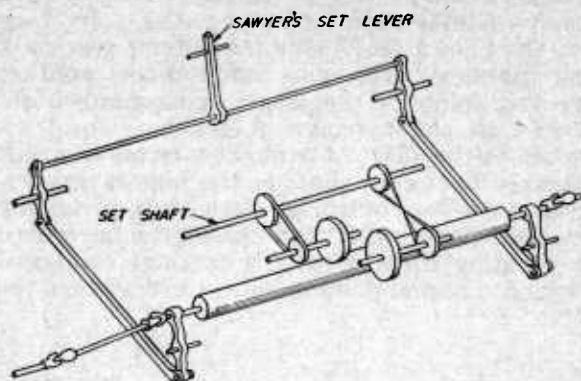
Drum-actuated setworks in which set lever moves drum against one friction wheel or the other to rotate set shaft in either direction.
